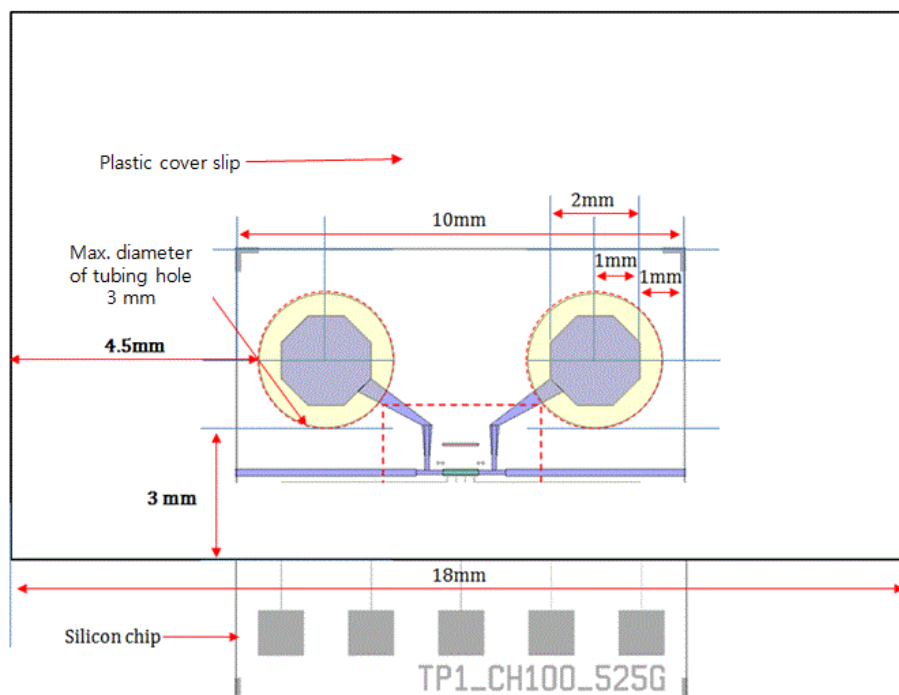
Dimensions of plastic cover slip with inlet and outlet hole.
